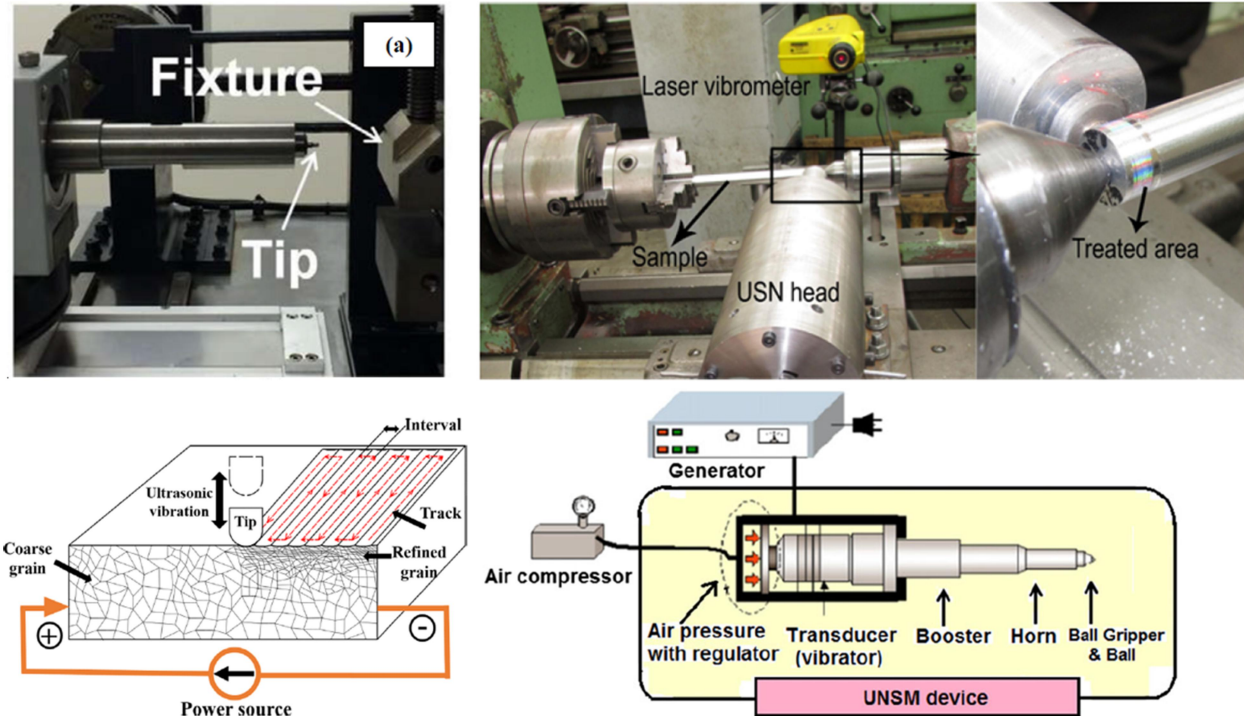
Schematic and devices of ultrasonic nanocrystal surface modification [47, 49, 96, 97]. Upper: vibration tool integrated into CNC machine; lower: mechanism of UNSM.
